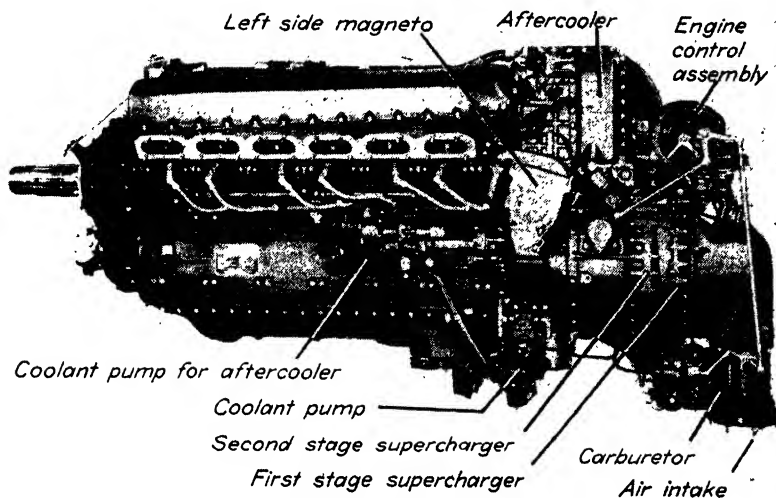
Packard Rolls-Royce engine. (Packard Motor Car Company.)
